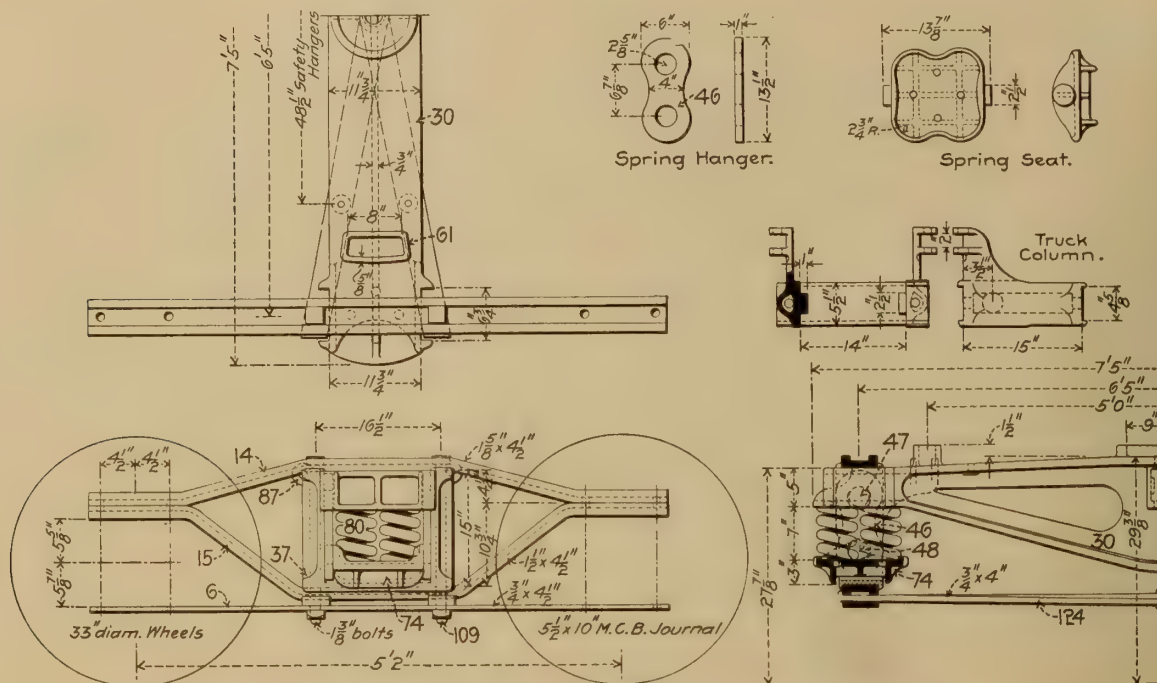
PLATE SIDE FRAME PASSENGER TRUCK. BARNEY & SMITH CAR CO., MAKERS.
